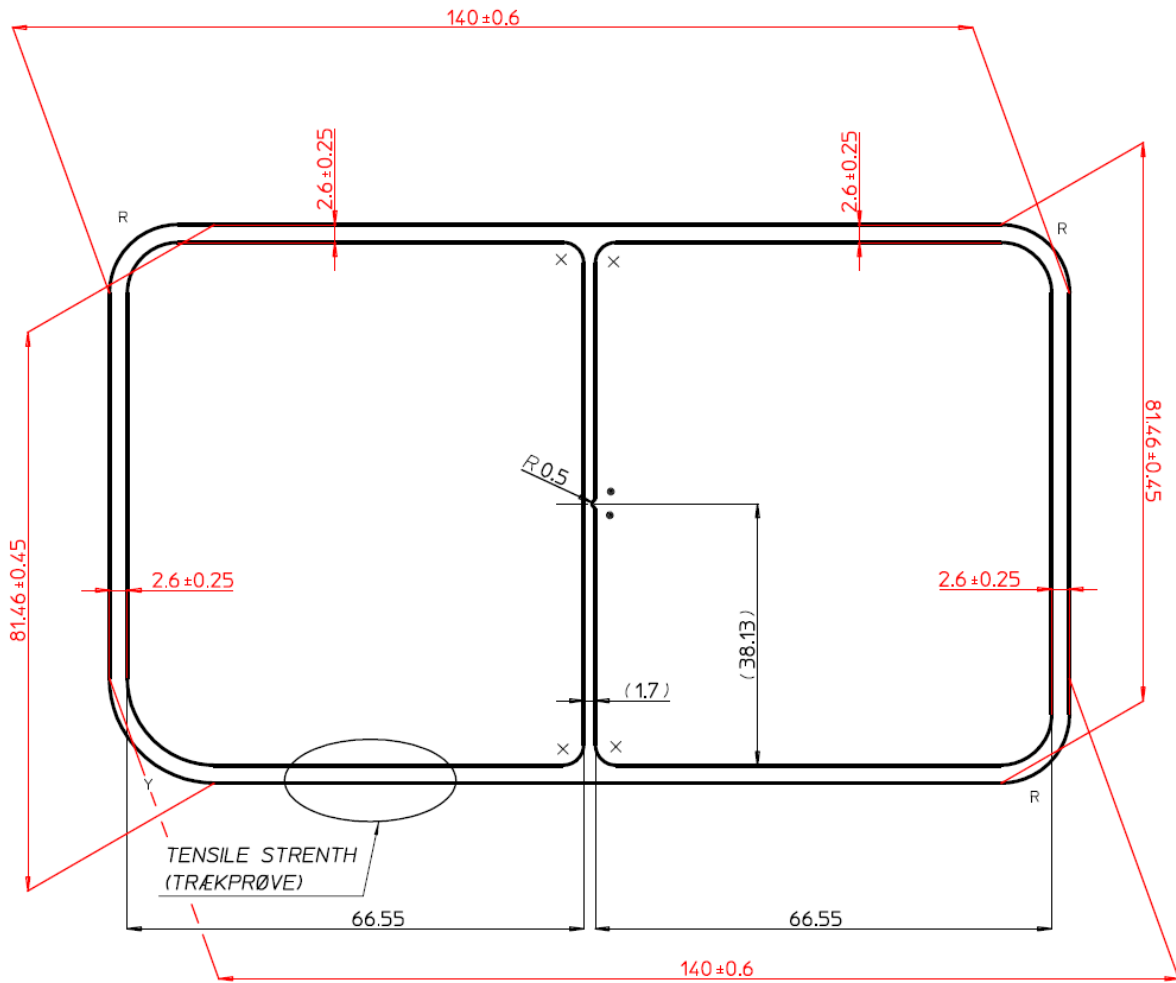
The shape and dimensions of the box profiles. All dimensions are given in millimetres.
